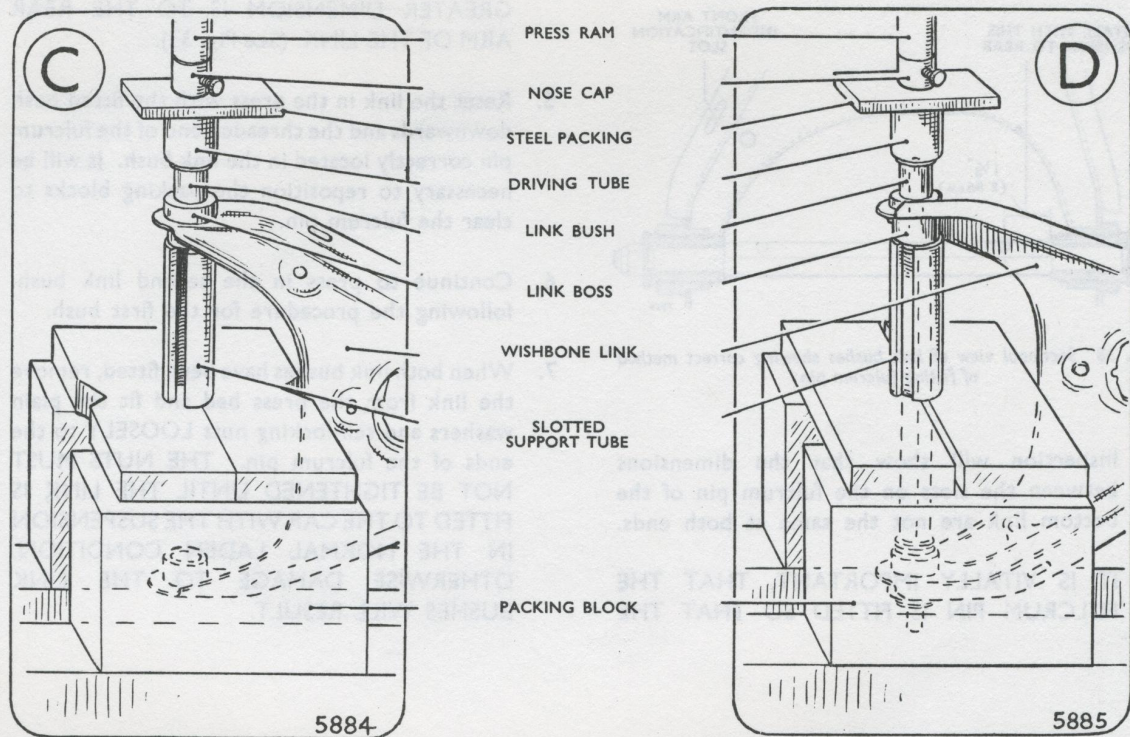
Illustrating method of fitting bushes to a link in a workshop press using special tool RG. 318
